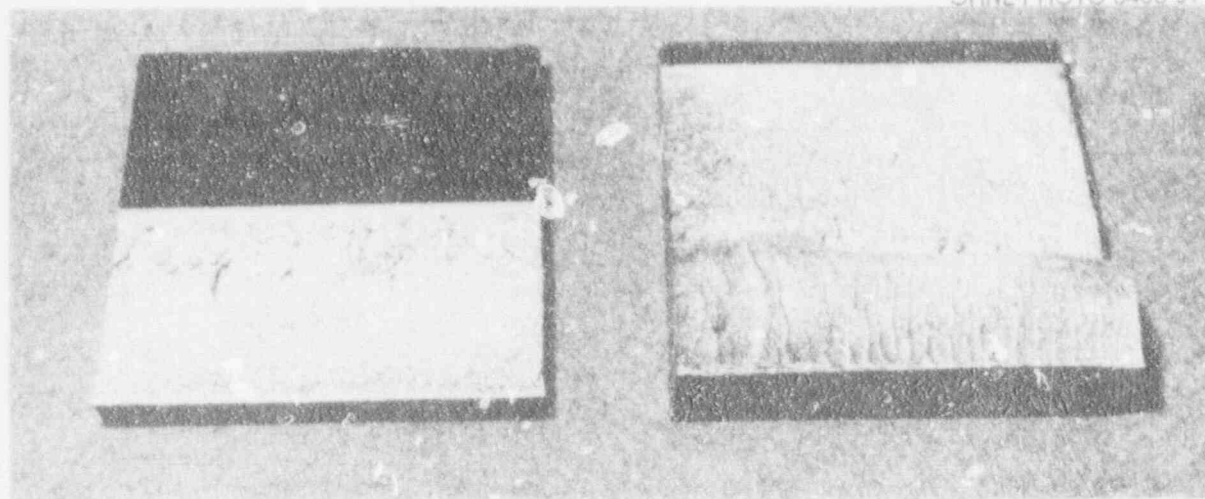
Photograph of representative shallow- and deep-crack beam [HSST beams 25 (left) and 26]
